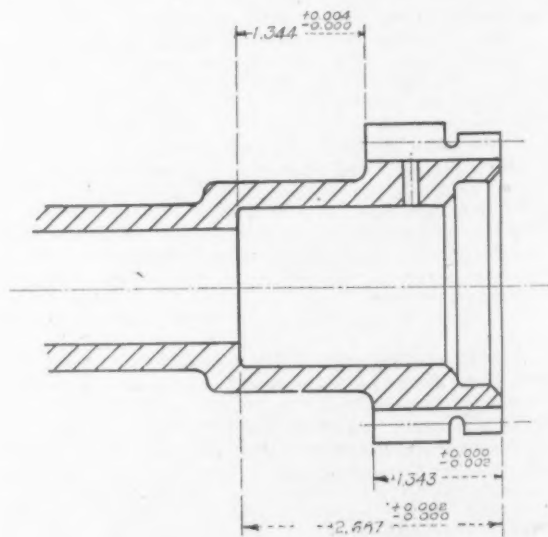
Tolerances on an Automobile Transmission Gear
